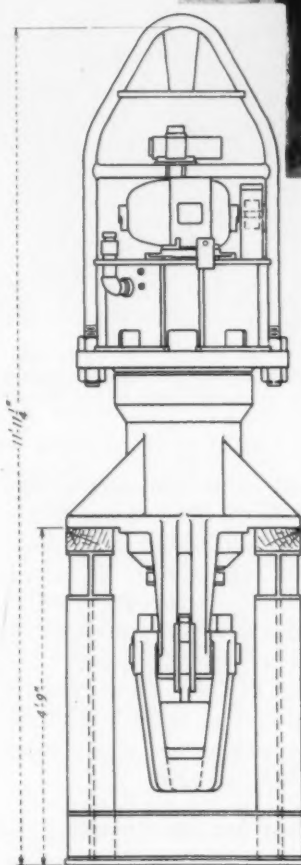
Drawing of the portable stripper resting on a stand when not in use. The total maximum stroke of the hydraulic ram is $18\frac{1}{2}$ in.
